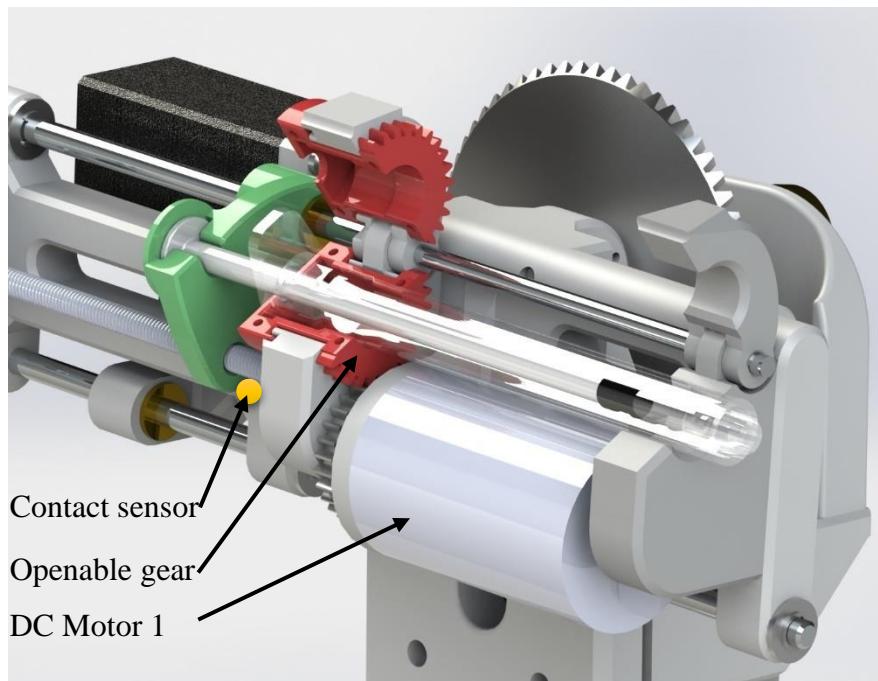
Motor 1 control (with gears in position to be opened and closed)
